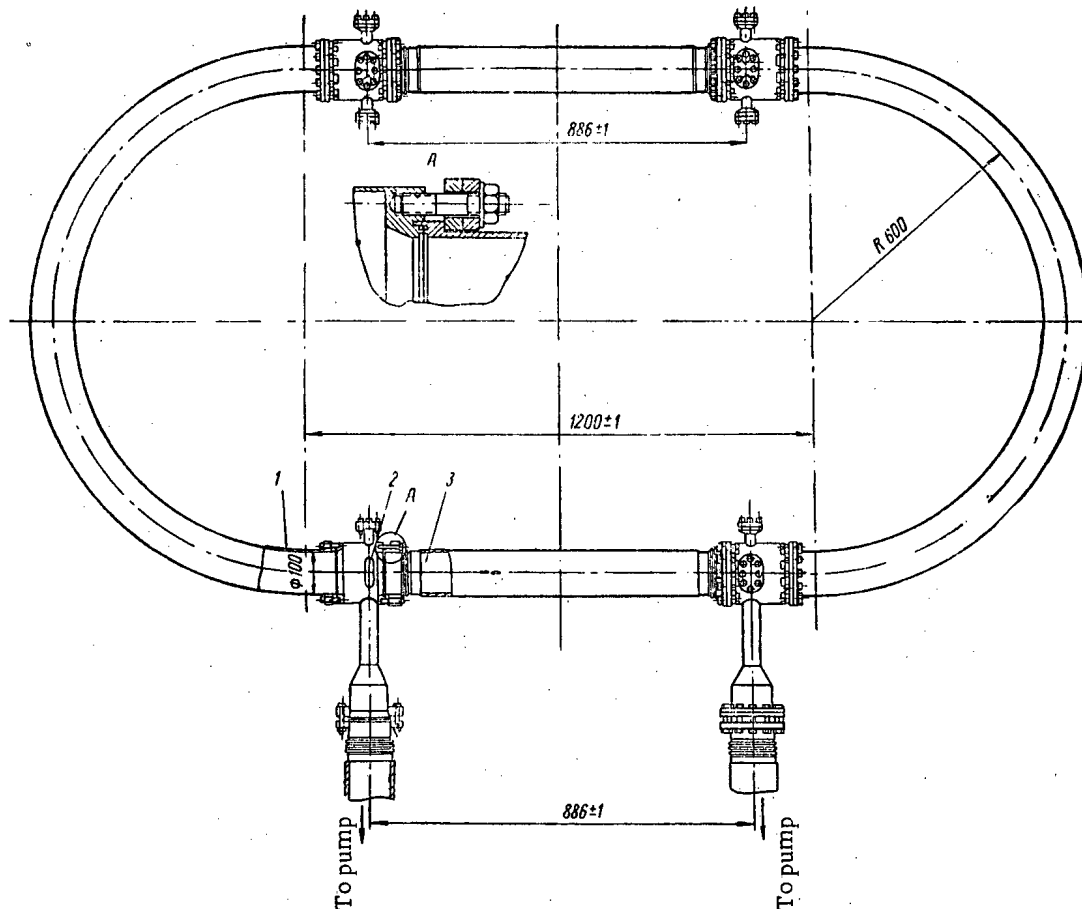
Vacuum chamber. 1) Semi-torus; 2) connection section; 3) straight section. A) Gasket location.
